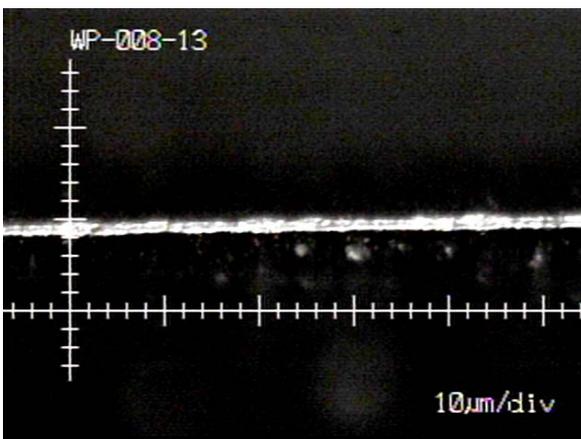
Blade used to cut with pine after 125 feet of cutting.
